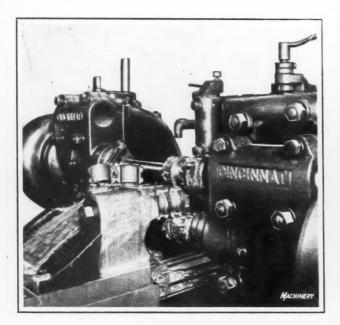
Sawing the Cap from the Crank End of Connecting-rods and milling the Bolt Bosses on the Same End
